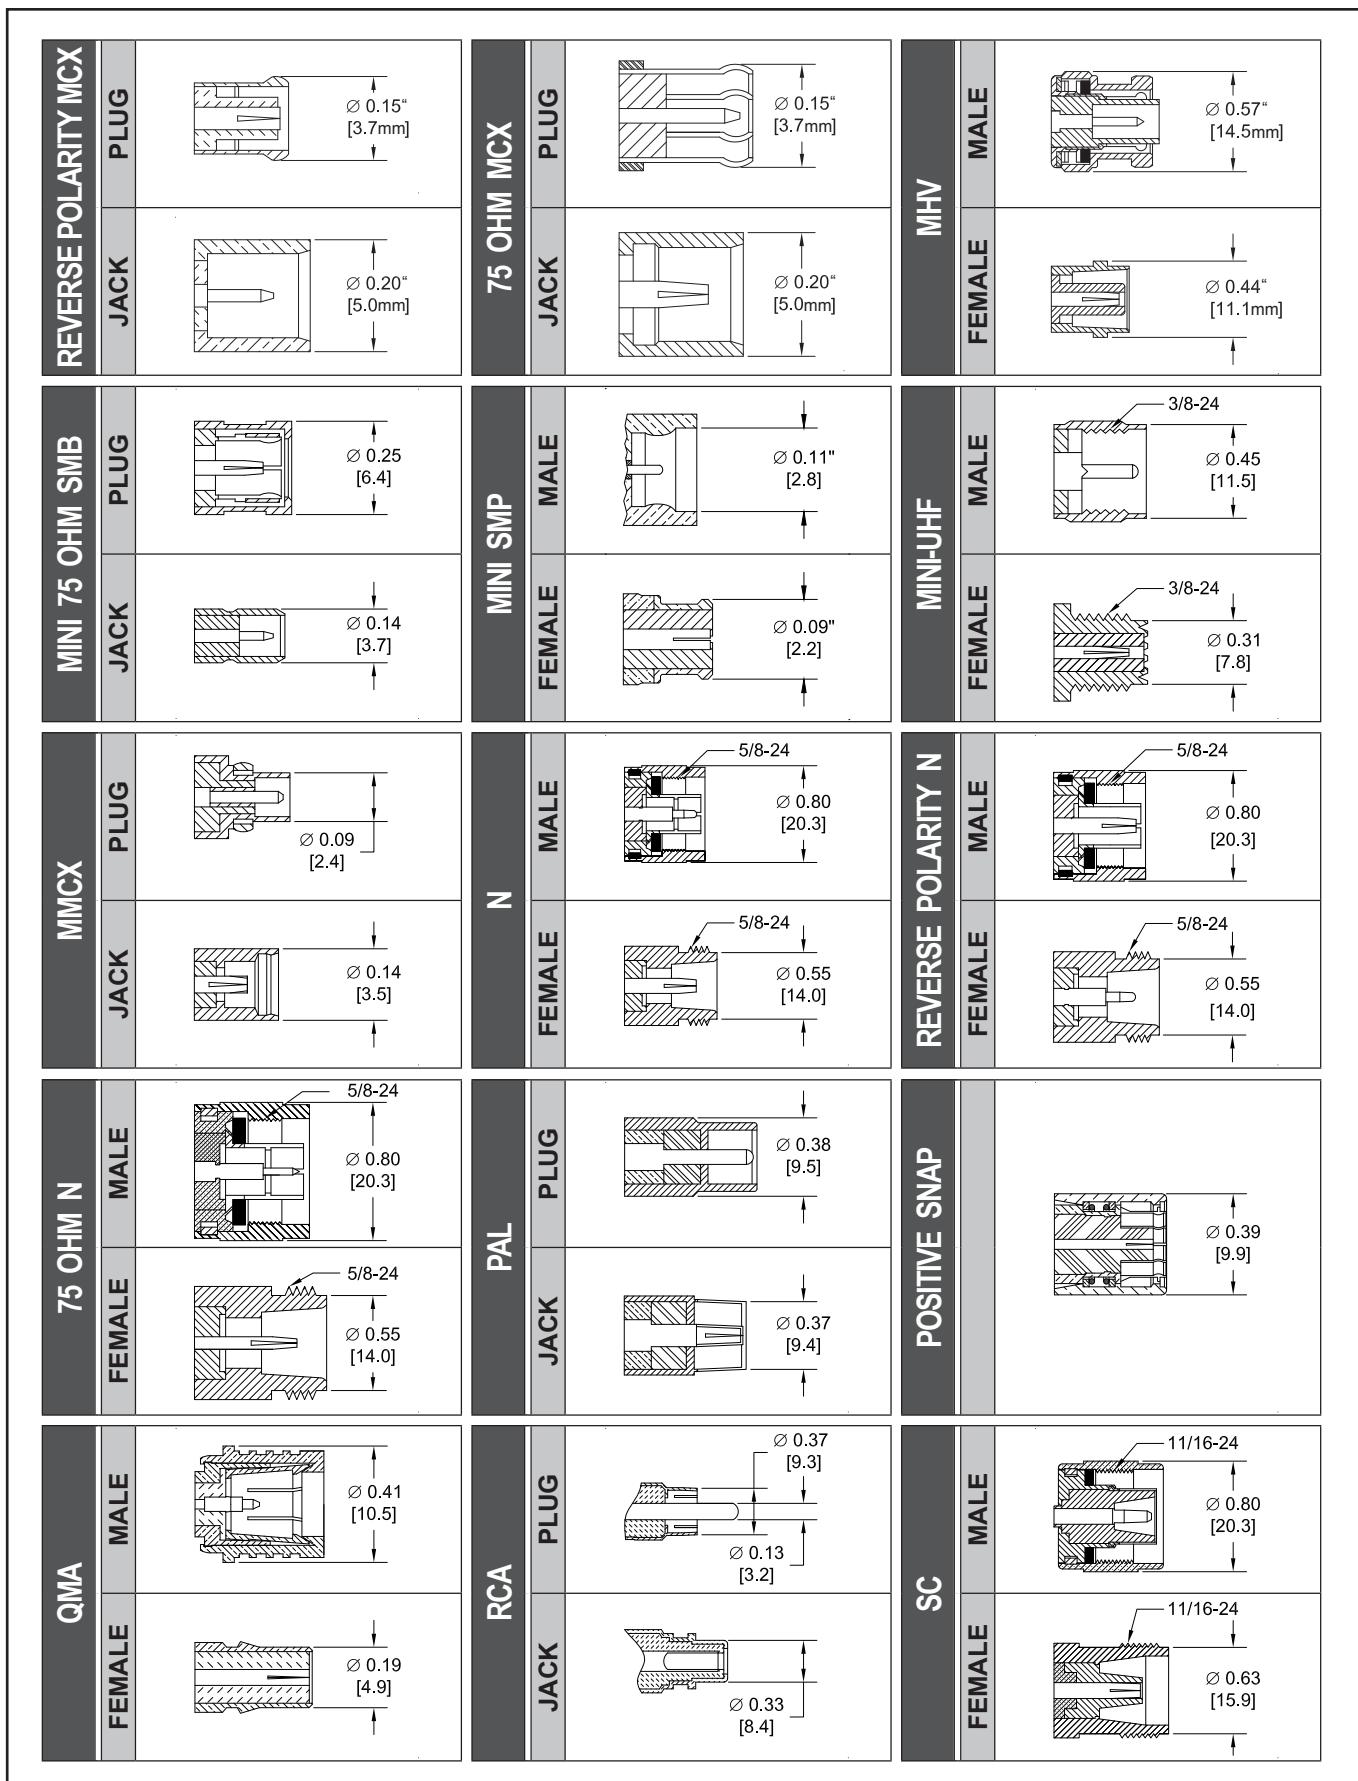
C — Connector side views, set 3 of 4. [Courtesy of Pasternak]
